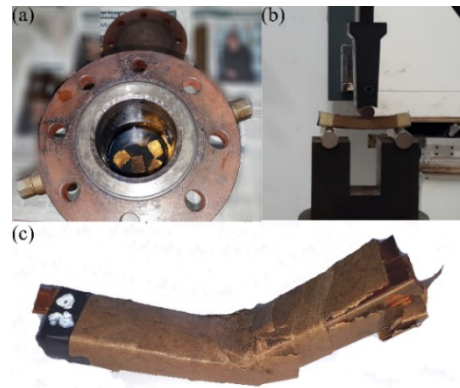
Insulated CTC test pieces (a) in the vessel filled with dielectric oil, (b) ongoing a three-point bending test, (c) after a bending test with  $d = 20$  mm.
